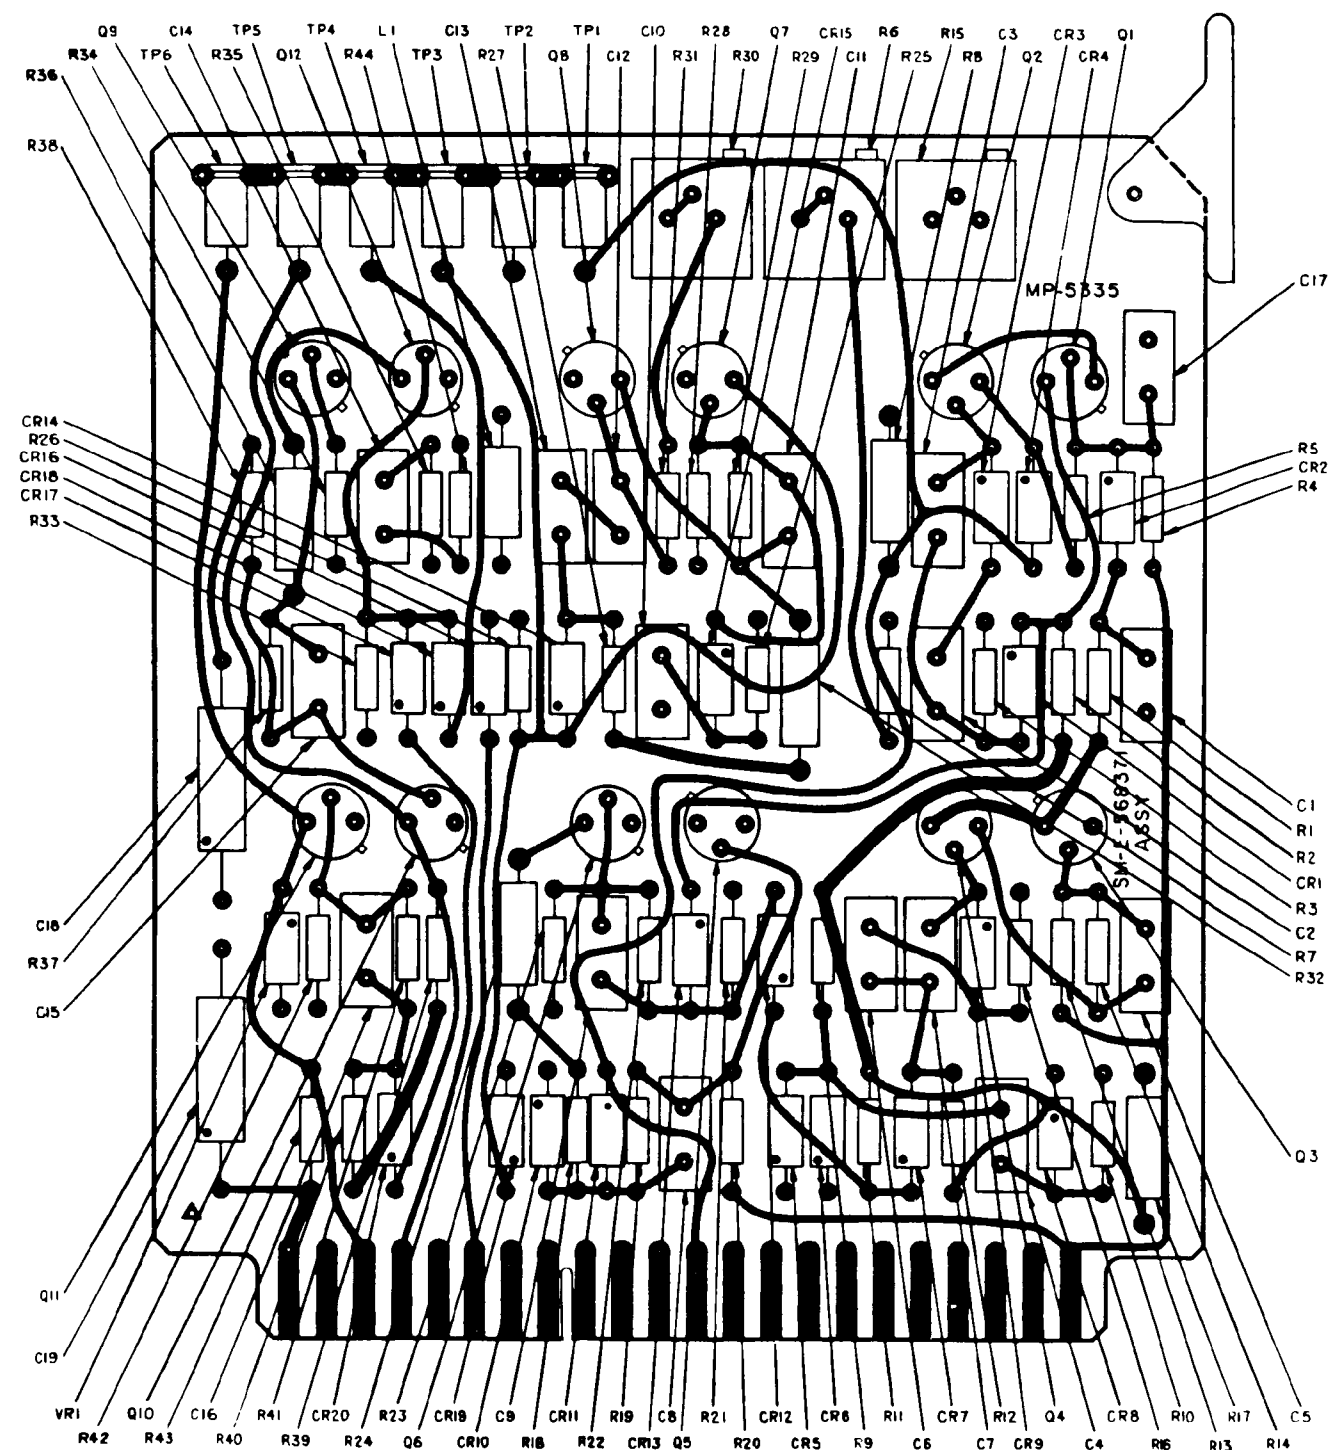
Decoder module A11, wiring diagram and parts location.
